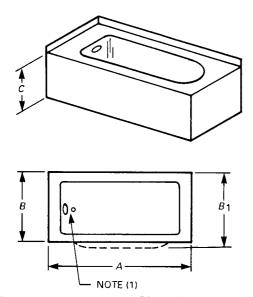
LOCATION OF SLIP-RESISTING SURFACES
